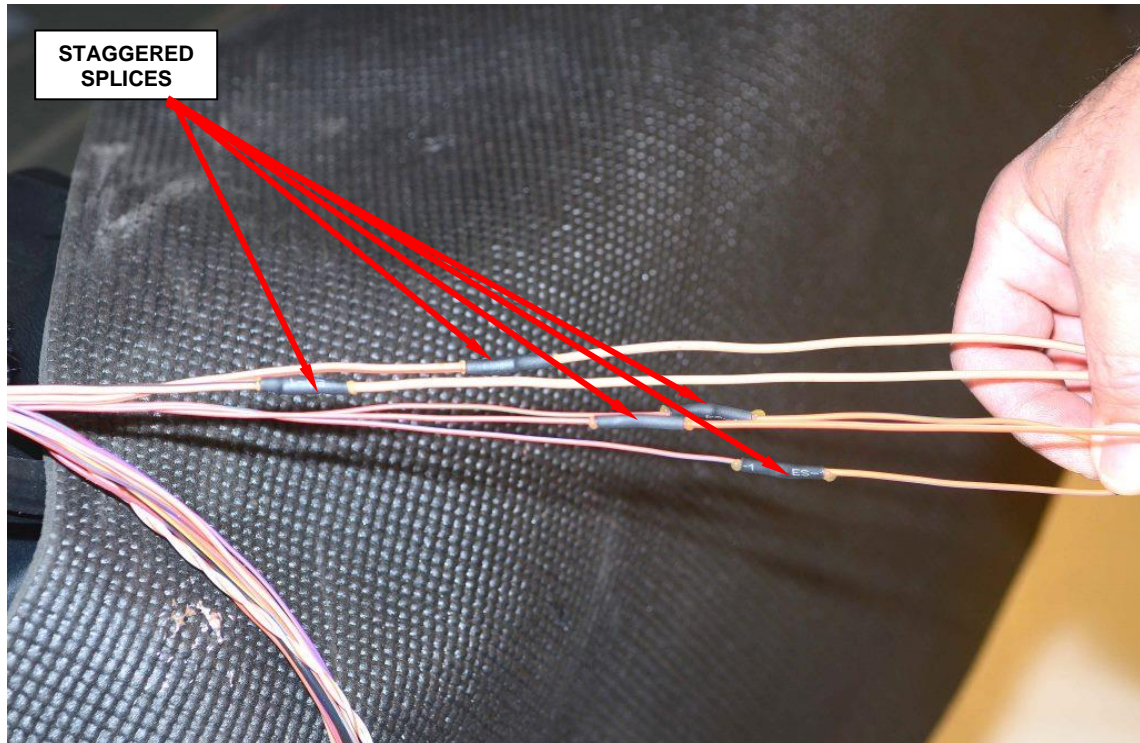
Correctly Spliced Wires (Staggered/Crimped/Soldered/Heat Shrink)
